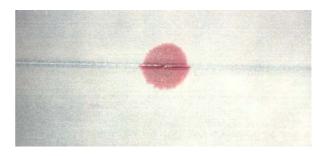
detected crack in a laser welded I-Core sandwich panel (from Reinert 1996).
